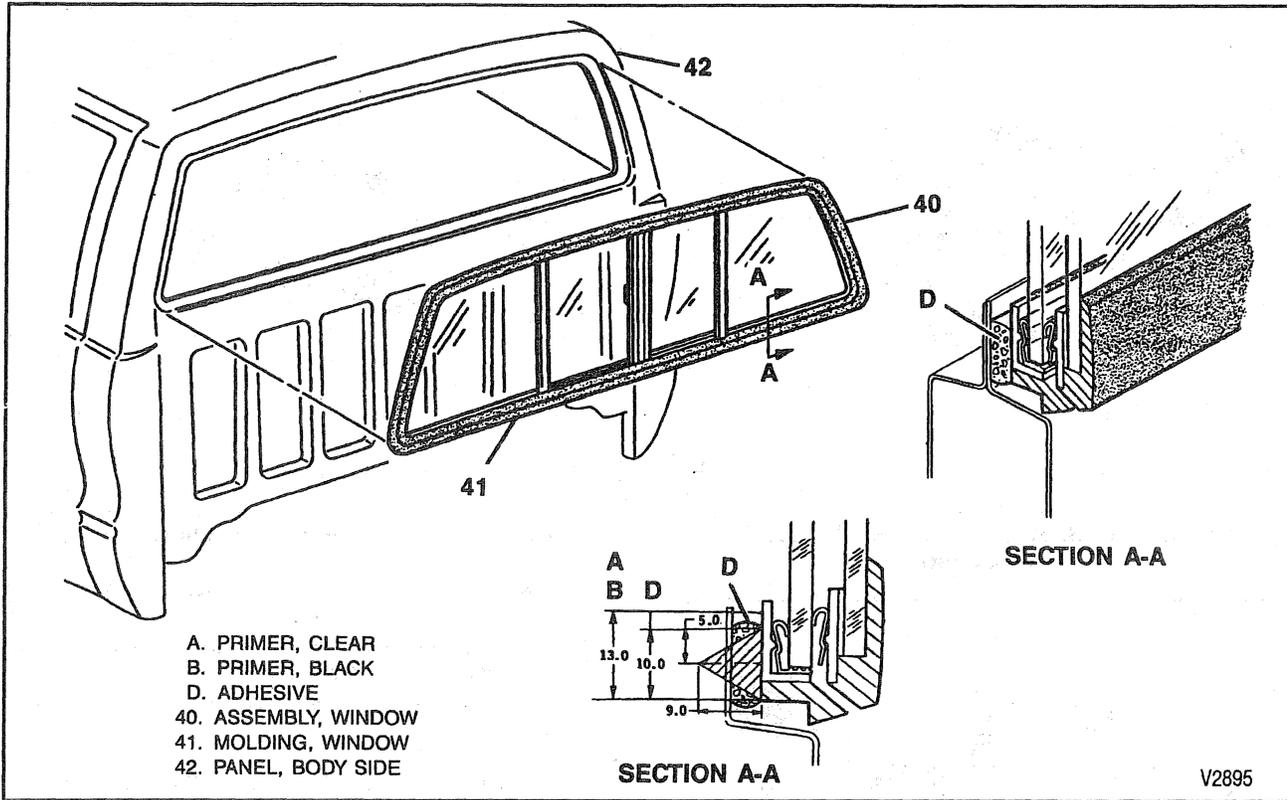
Rear Sliding Glass Window Assembly-Pickup
